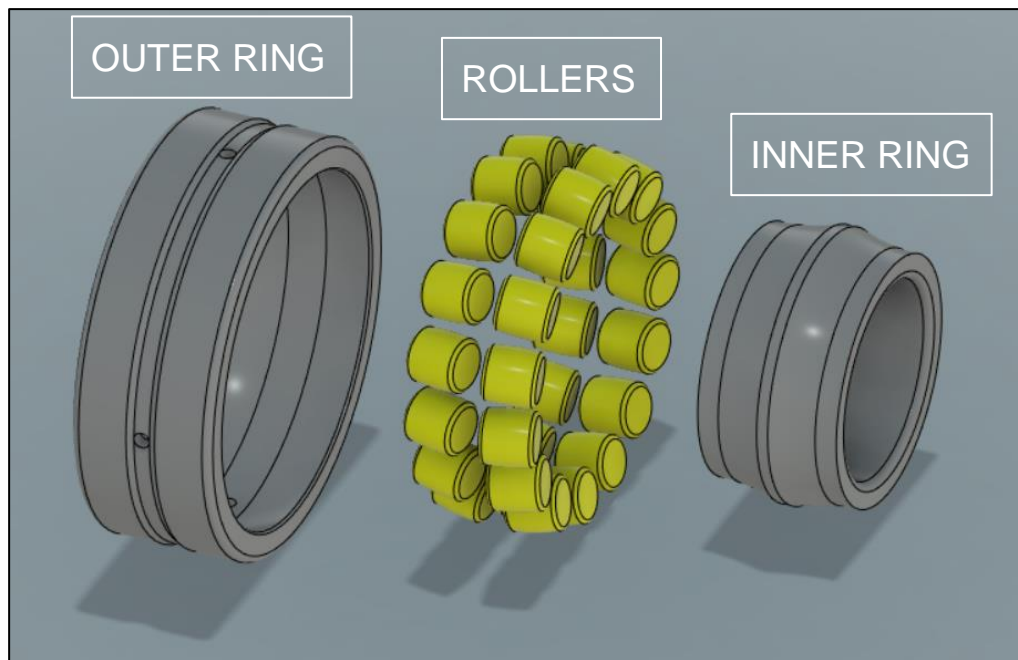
Exploded view of roller bearing [6]. Used with permission.
